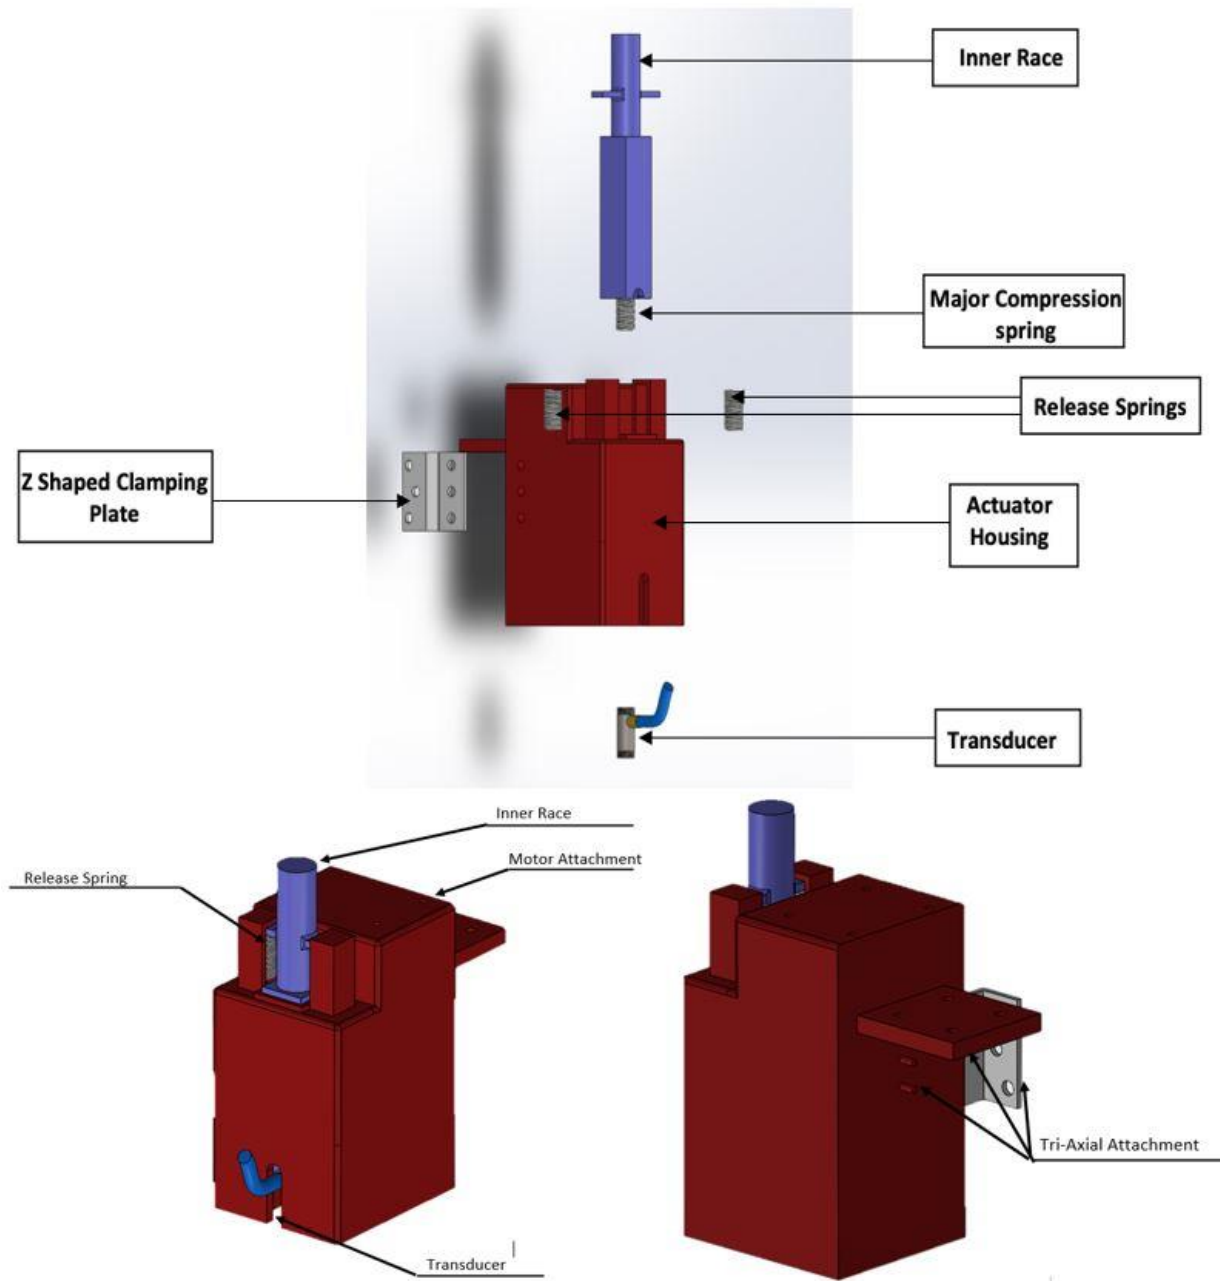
Exploded view and assembled view of end-effector actuator and housing
